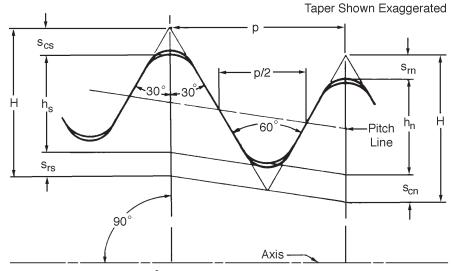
Tubing Round Thread Form (See Table 10 or Table 10M for dimensions.)
